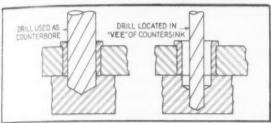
Shown here is the countersinking performed by first using the end of a large guided drill, drilling only deep enough to produce the required countersinking.
